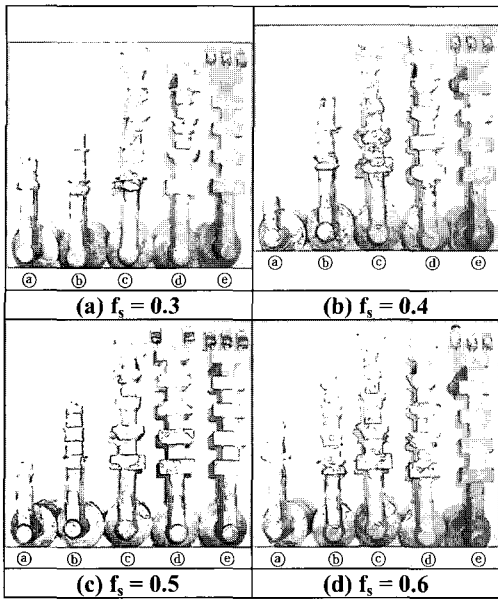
The photograph of specimen part after filling test in each solid fraction
